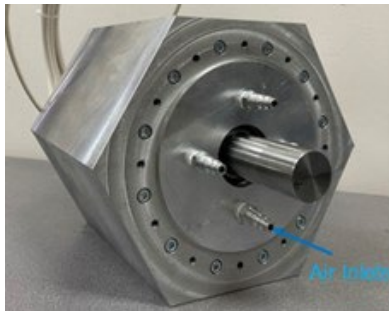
Drive-end view of assembled electrical machine showing 4 air inlets.
